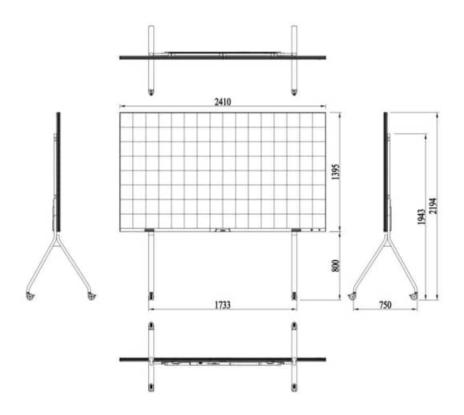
The dimensional drawing of non-touch version mobile stand X108
